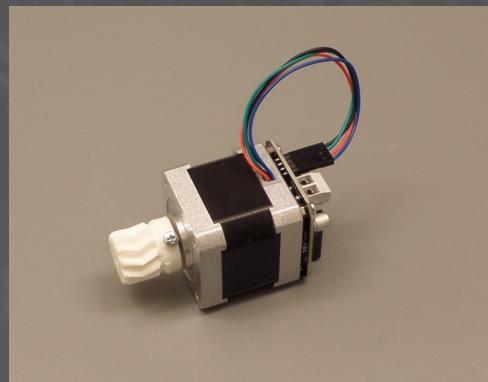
Prepare the main gear motor by sliding the gear onto the shaft. Remember to add M3 nut and screw to the gear.
